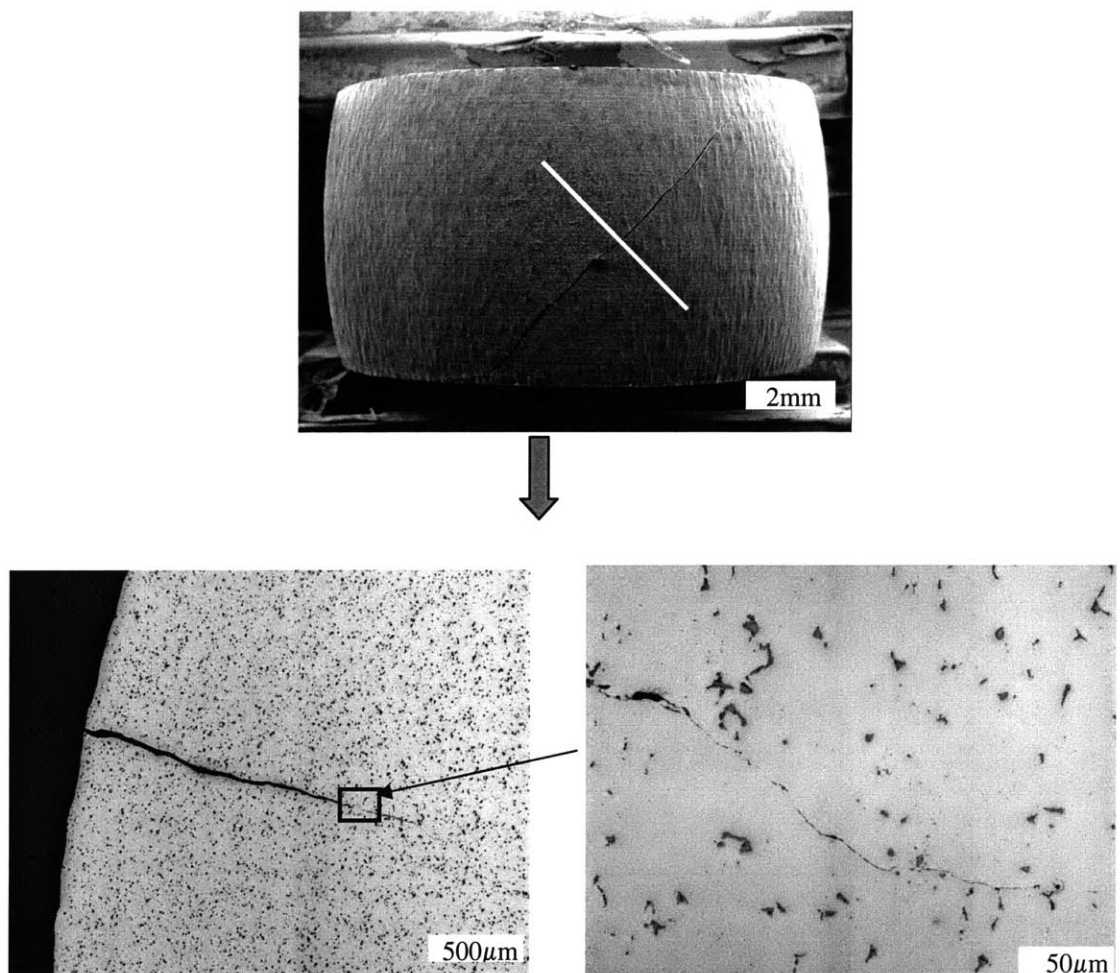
“Shear fracture” through the matrix in the upsetting specimen
